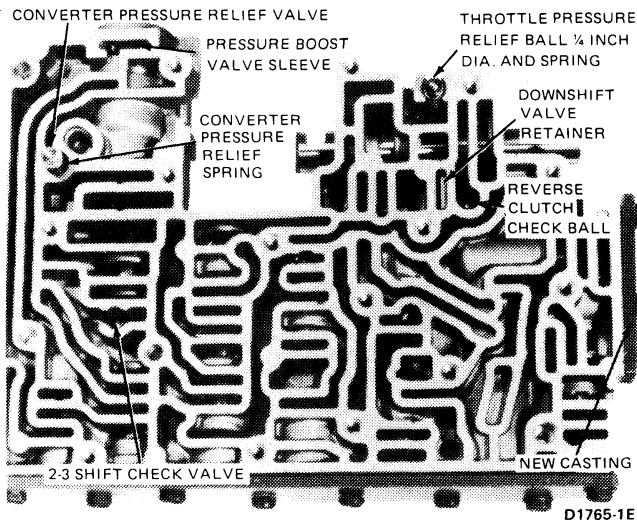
Converter Pressure Relief Valve, Throttle Pressure Relief Valve, and 2-3 Shift Check Valve Locations
